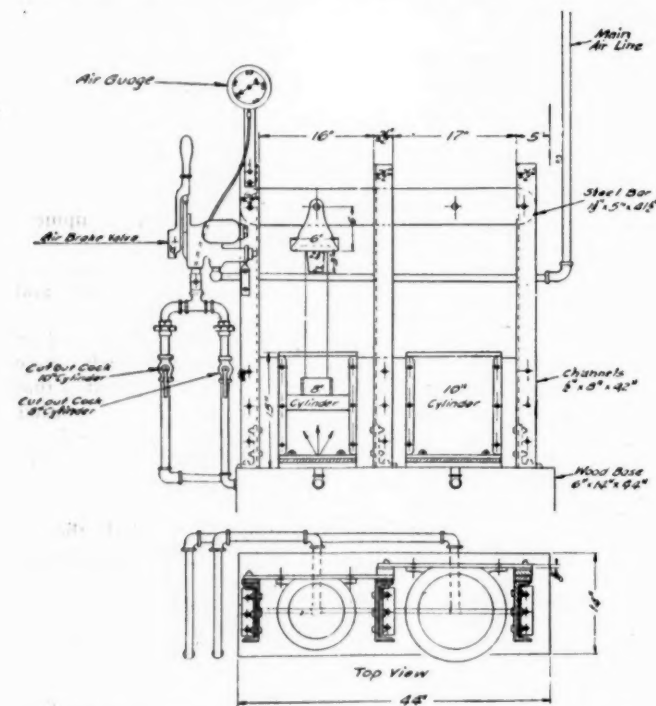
Brake Cylinder Packing Leather Test Rack
